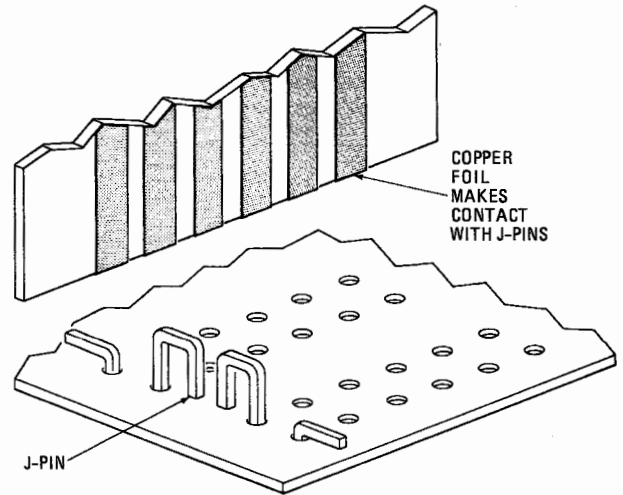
HOW J-PINS CAN BE USED as edge-connector socket pins for a PC board.
